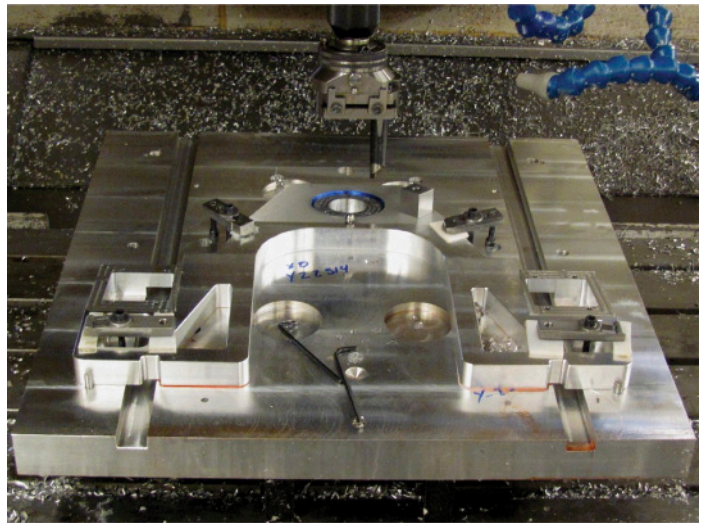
KOSMOS part in fabrication in an NOAO CNC milling machine. (Image credit: NOAO.)
